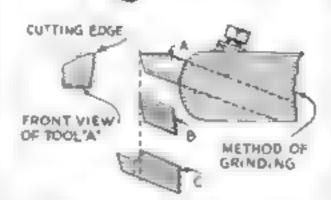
How a first handed tool bit should be chaped for rough turning is shown at A
